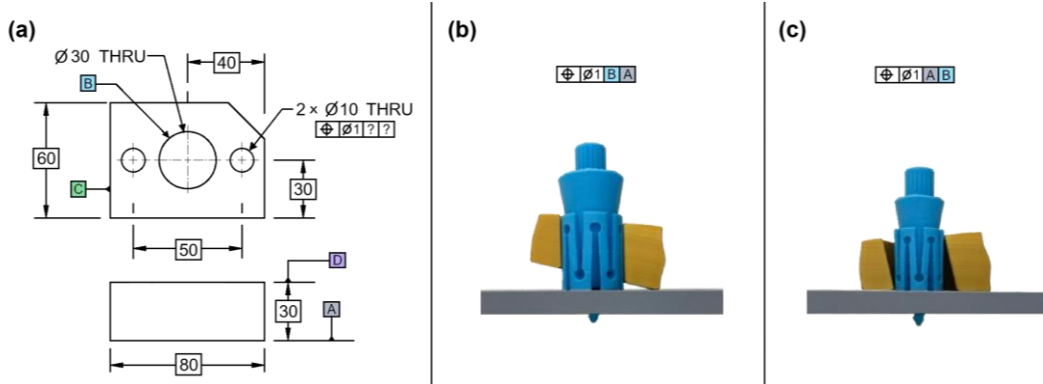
(a) Drawing with a cylindrical datum feature and an incomplete FCF. Note: All dimensions not required to interpret the positional tolerance are omitted. (b) The modular gaging system acting as a datum simulator if the FCF were to have datum references -BA-. (c) The modular gaging system acting as a datum simulator if the FCF were to have datum references -AB-. The workpiece is shown in yellow and presented in cross-section.
